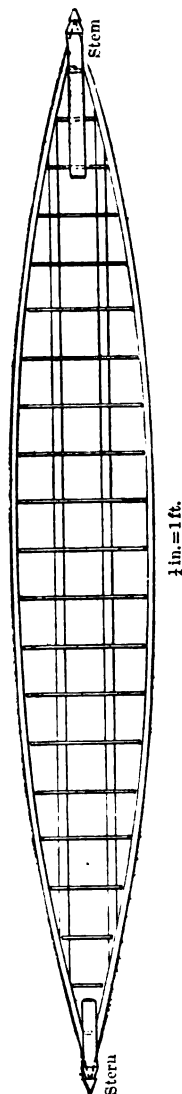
FLOOR-EDGE STRIPS FIXED FOR NAILING SIDES TO
